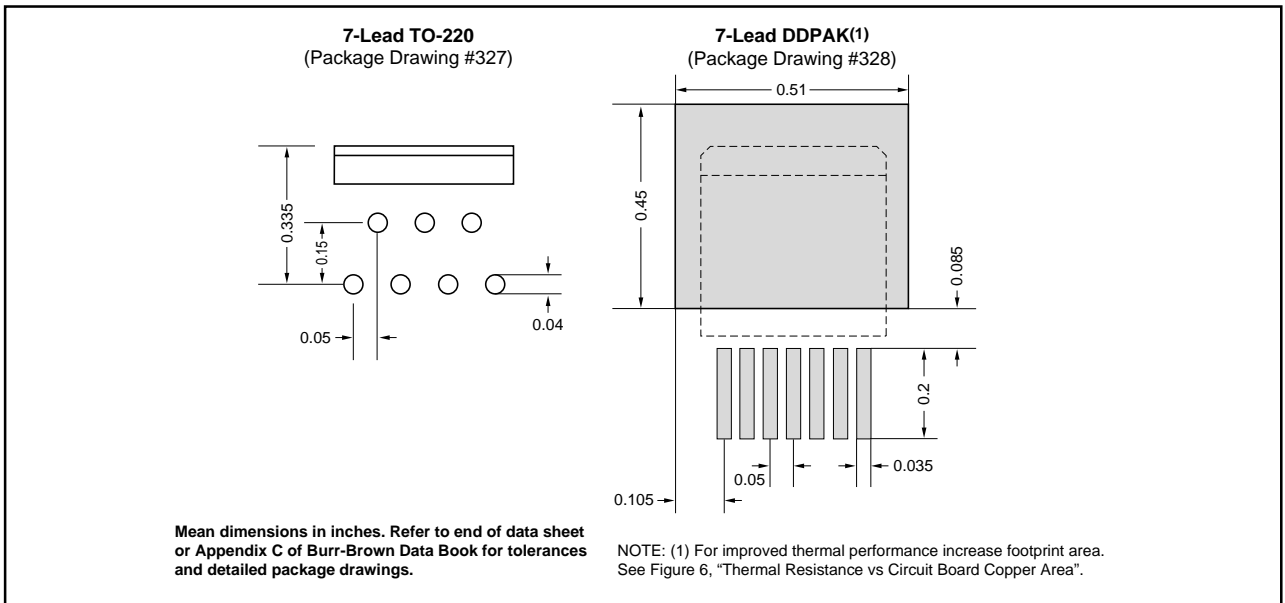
TO-220 and DDPAK Solder Footprints.
